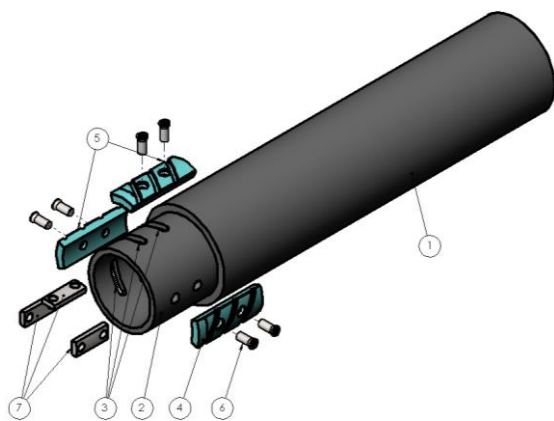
General appearance of a combined tool for expanding holes with cutting-smoothing guiding inserts with 60° cutting edge inclination
